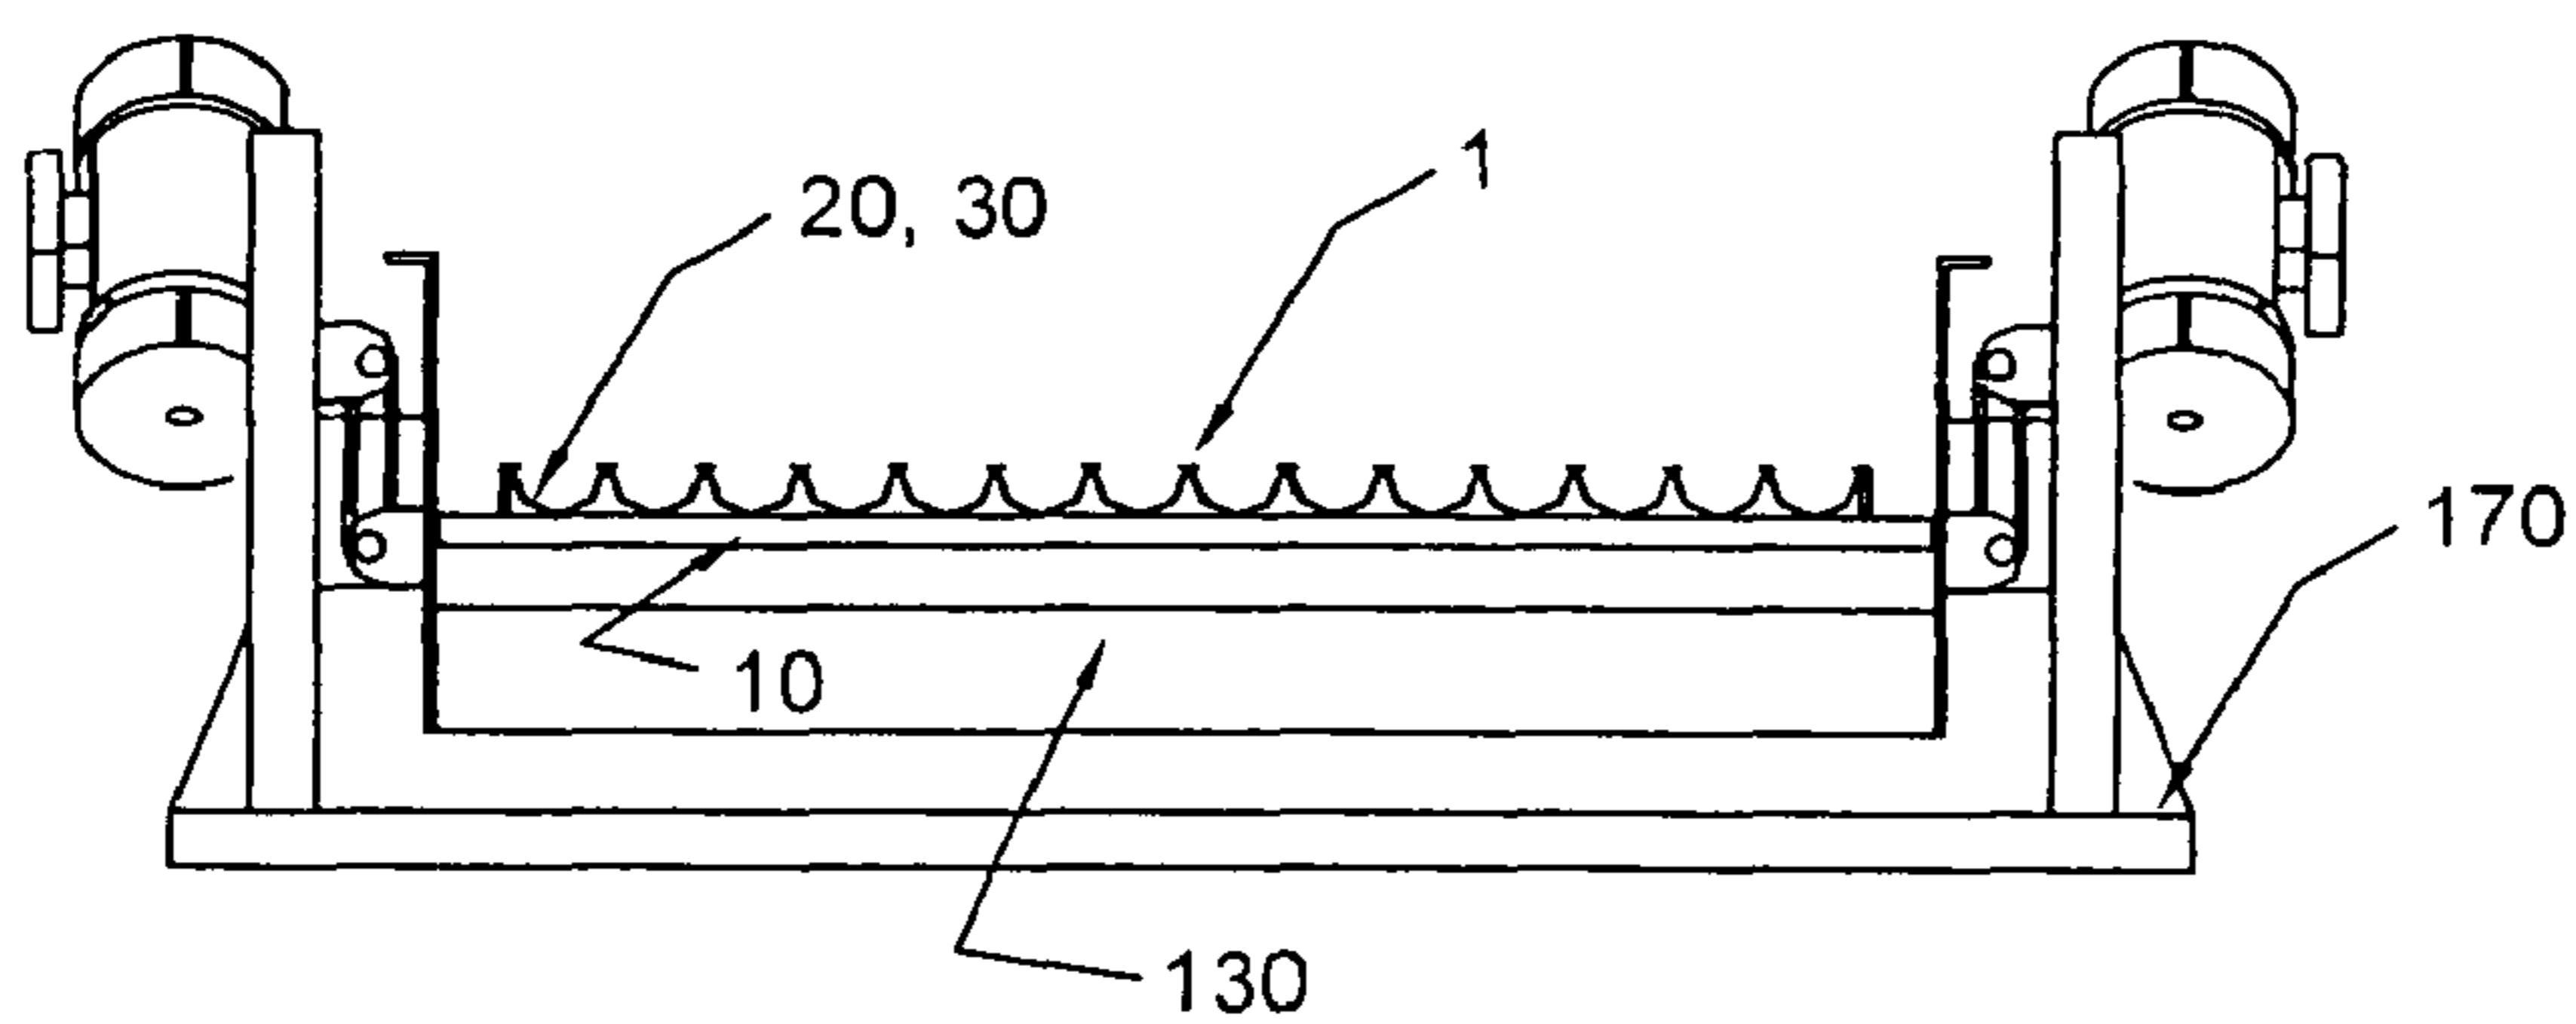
B: Discharge End View of Separator with Screen Assemblies Installed
